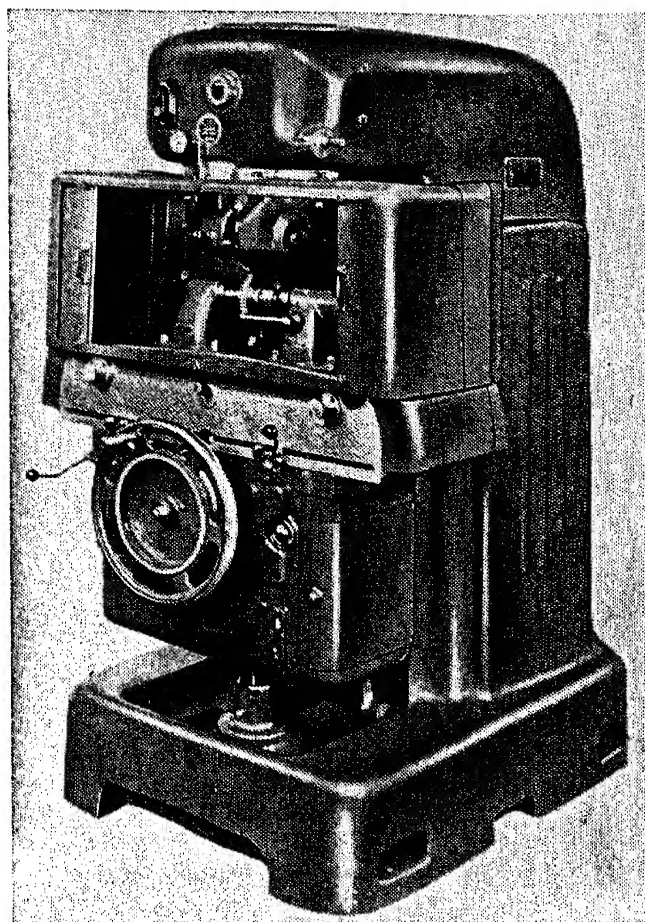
A 12 in. rotary gear shaving machine. (Courtesy National Broach and Machine Co.)
